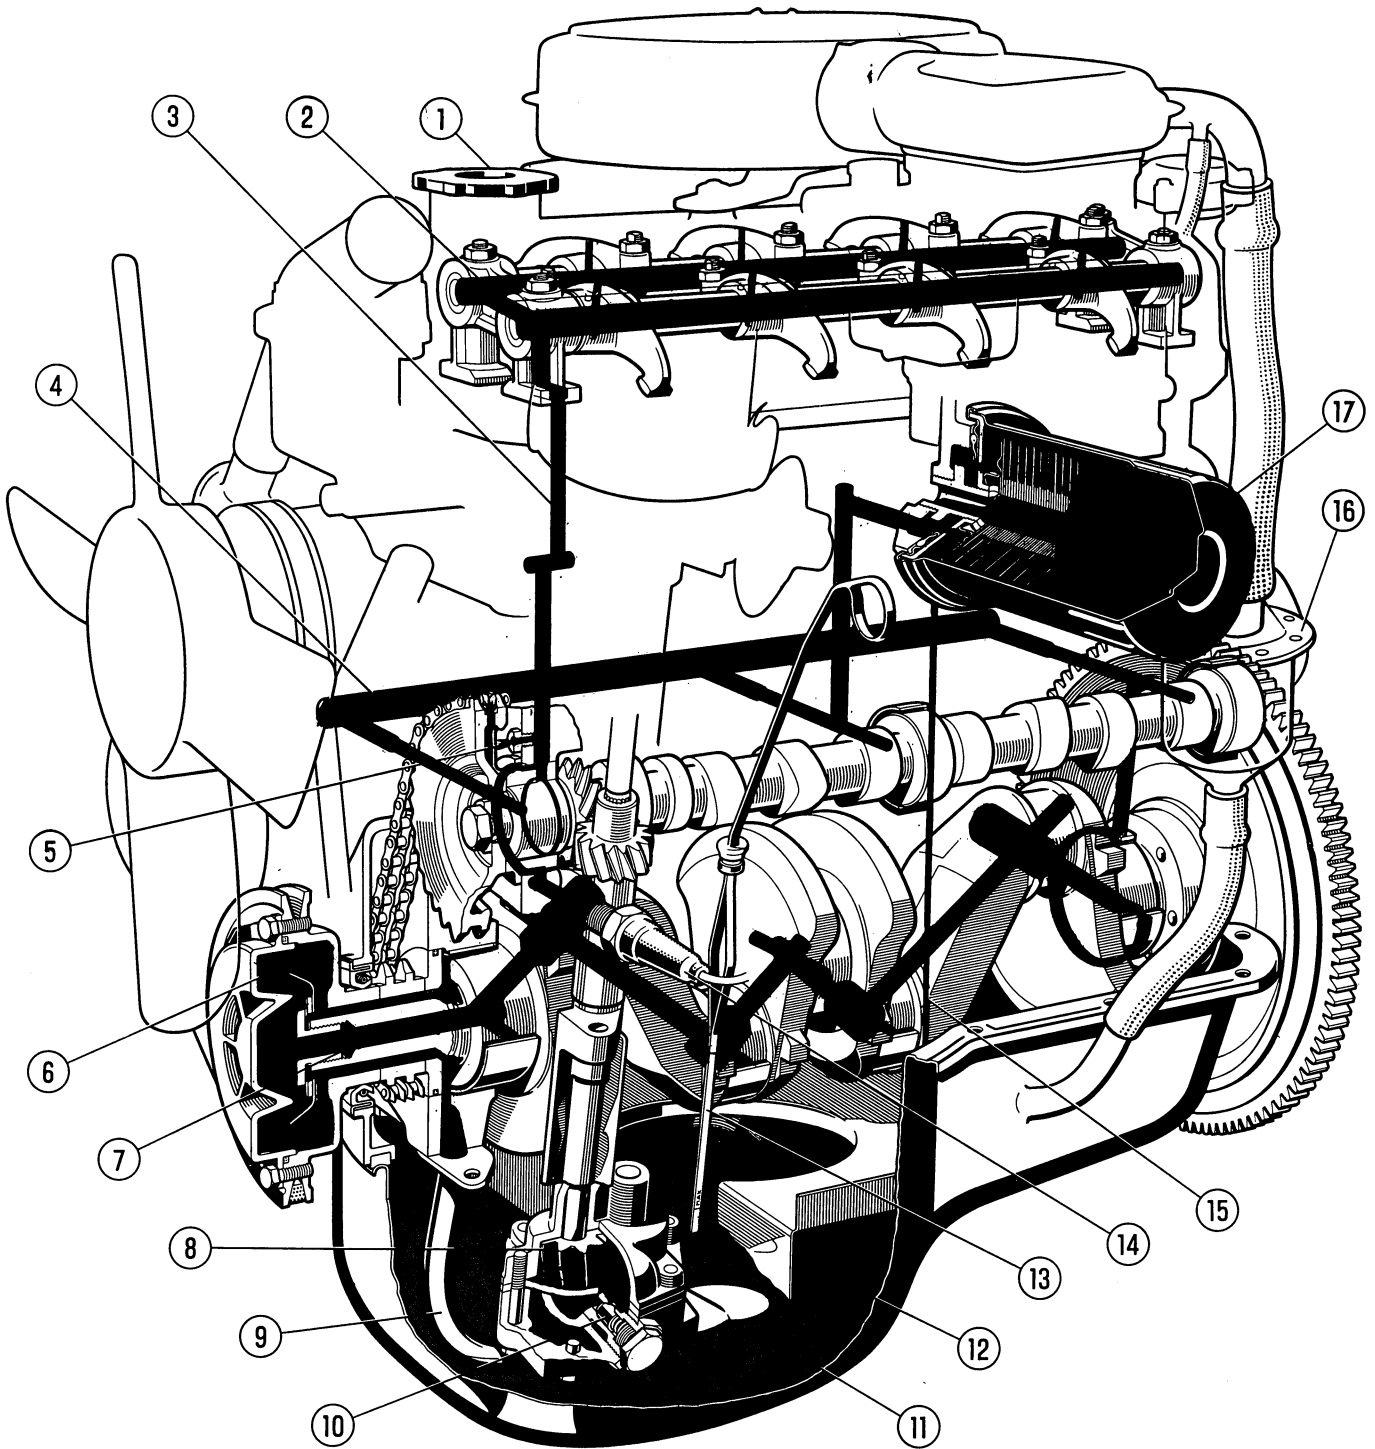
Cut-away and phantom view of 115 C.005 engine lubrication system.
